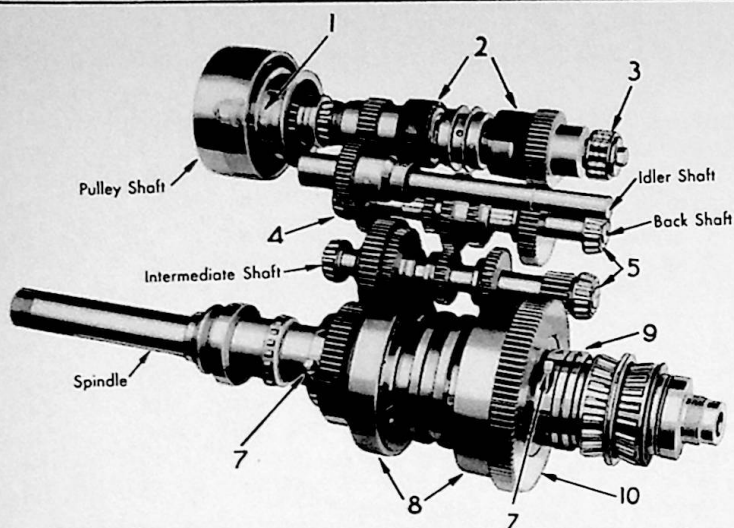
Six Speed Head for No. 2 Turret Lathe.
